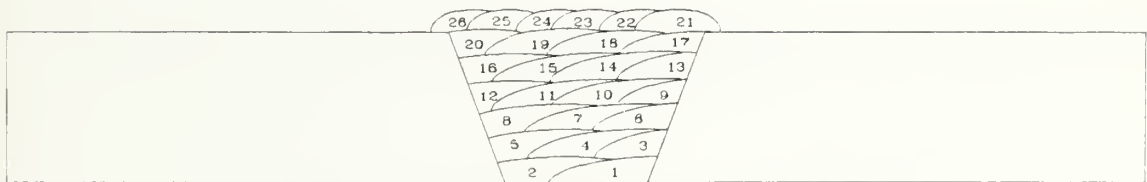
HY-80 Overmatched Specimen Weld Bead Arrangement
